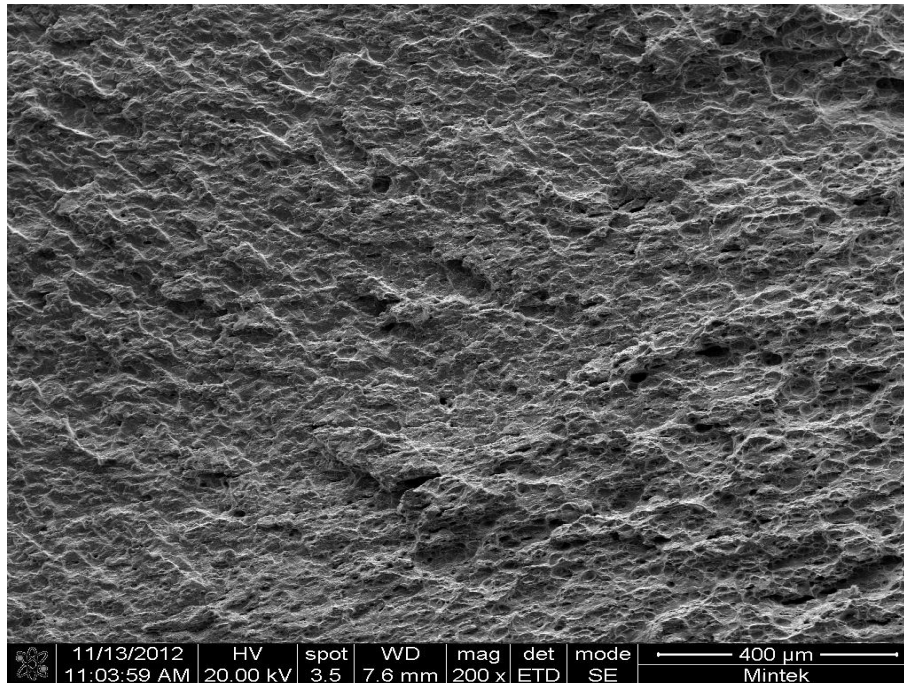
Crack initiation zone of AISI 316L sample carburised at 700°C showing brittle (tearing) fracture.
